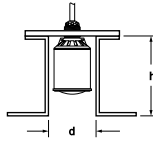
Nozzle mounting with deviating nozzle dimensions
